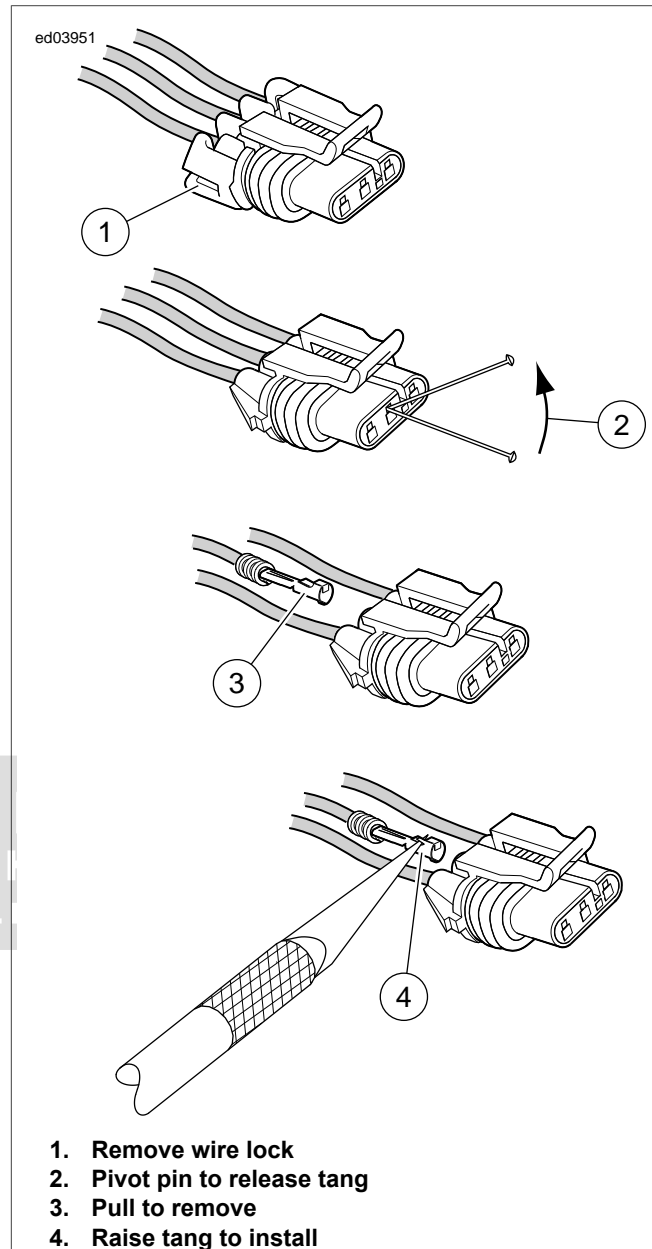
Removing Delphi Metri-Pack Sealed Connector: Push-to-Seat
